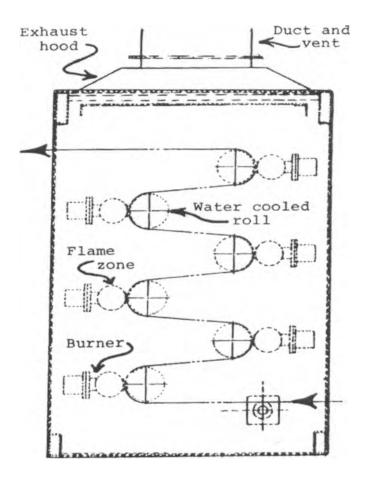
A typical singer showing its component and fabric travel (Courtesy of Menzel Inc.). singeing machine is equipped with mechanical threading devices. The cloth is passed over tension rails, adjustable tensioner and then over gas burners. The fabric passes
